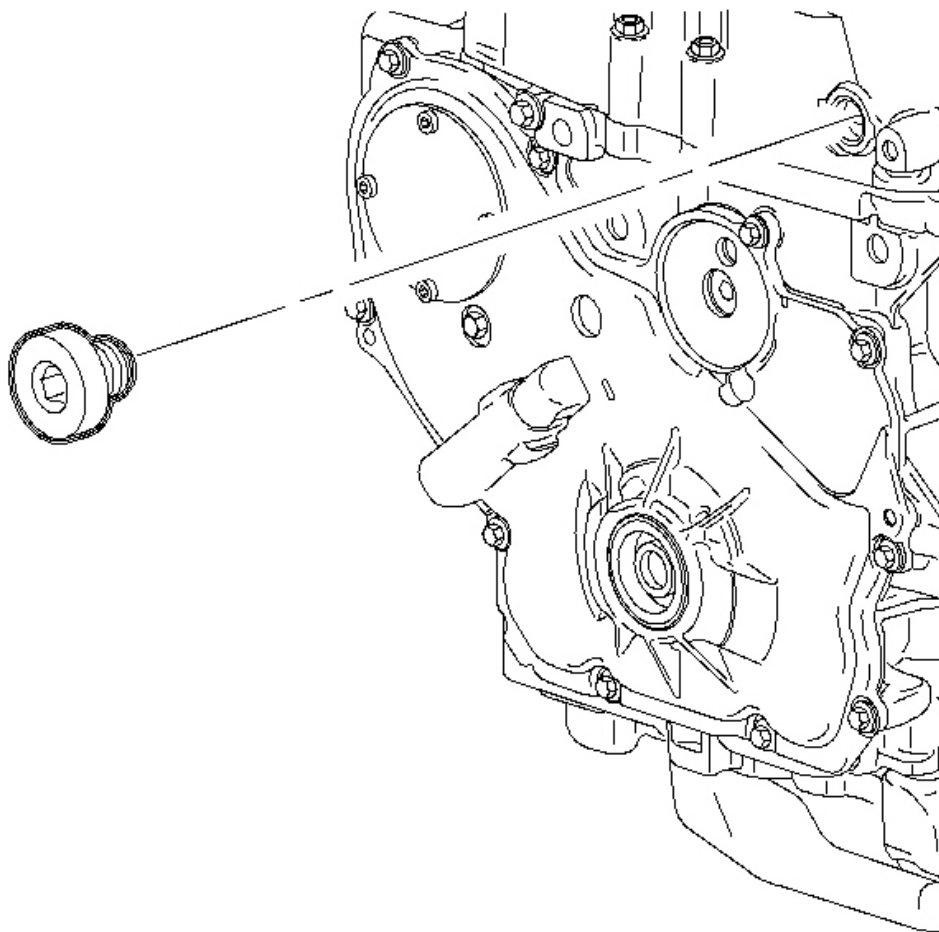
Removing Fixed Timing Chain Guide Access Plug
